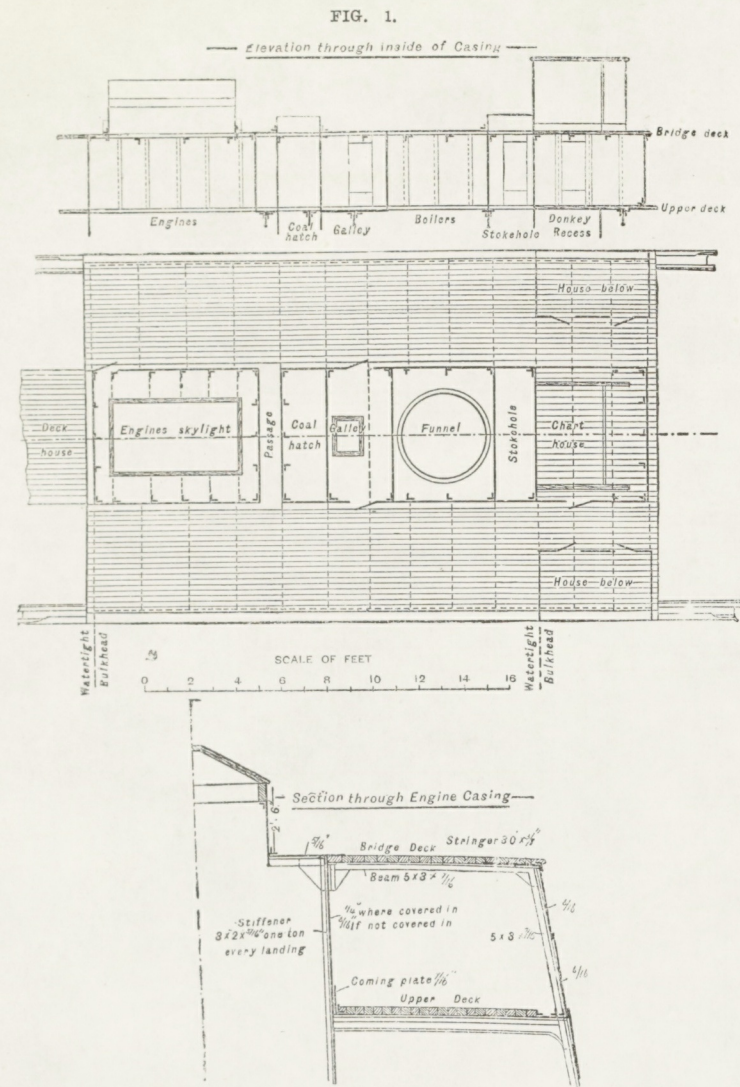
Sketch of Engine and Boiler Casing of a Three-decked Cargo Steamer, with Bridge Deck extending the whole length of the Openings.
